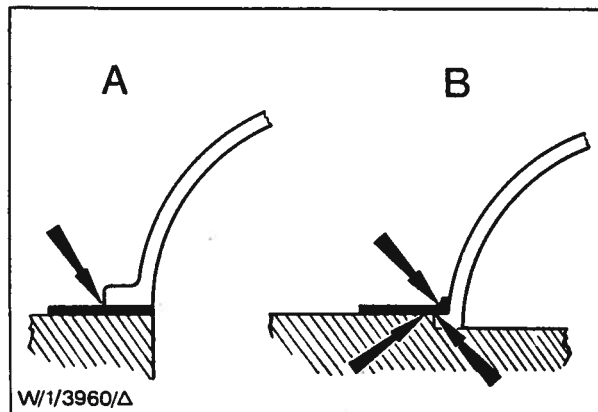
Oil Pan Gaskets and Seals Installation for All Engines Except 2728T
